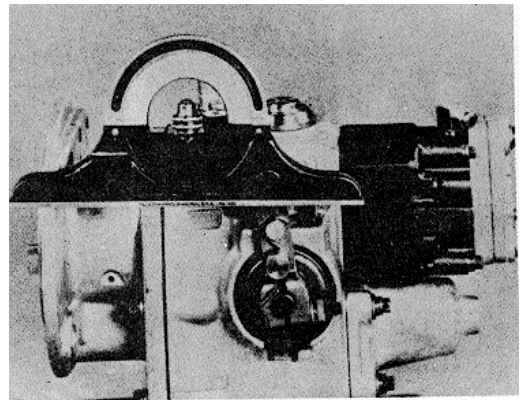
, F5239, Setting throttle travel with protractor
